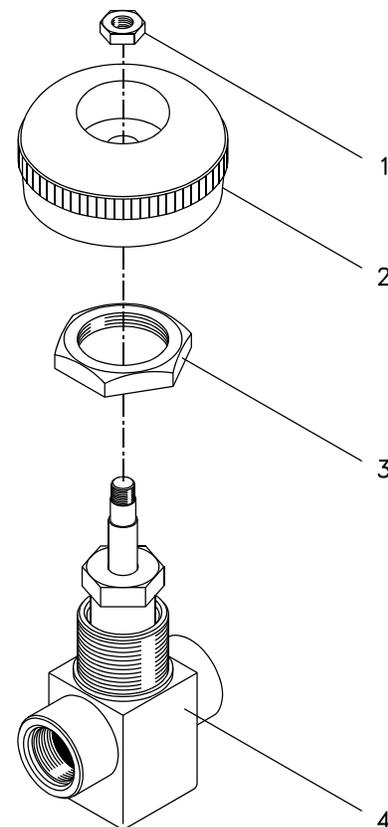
Circle Seal HP Isolation Valves (AHP-V501 thru AHP-V504 and AHP-V601)
